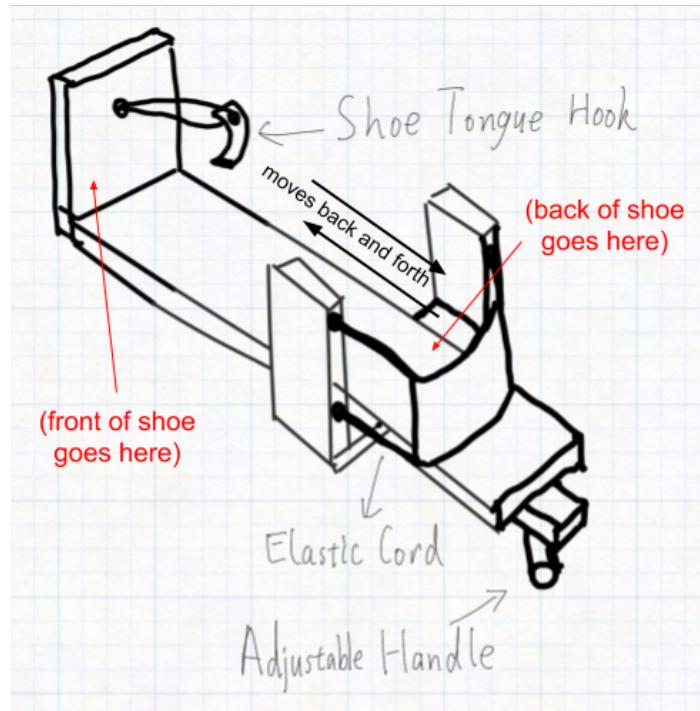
Mockup 8 - Pull N' Expand V3 Diagram. The drawing illustrates the structure of different parts of the device. Drawing by Sam Huang.
